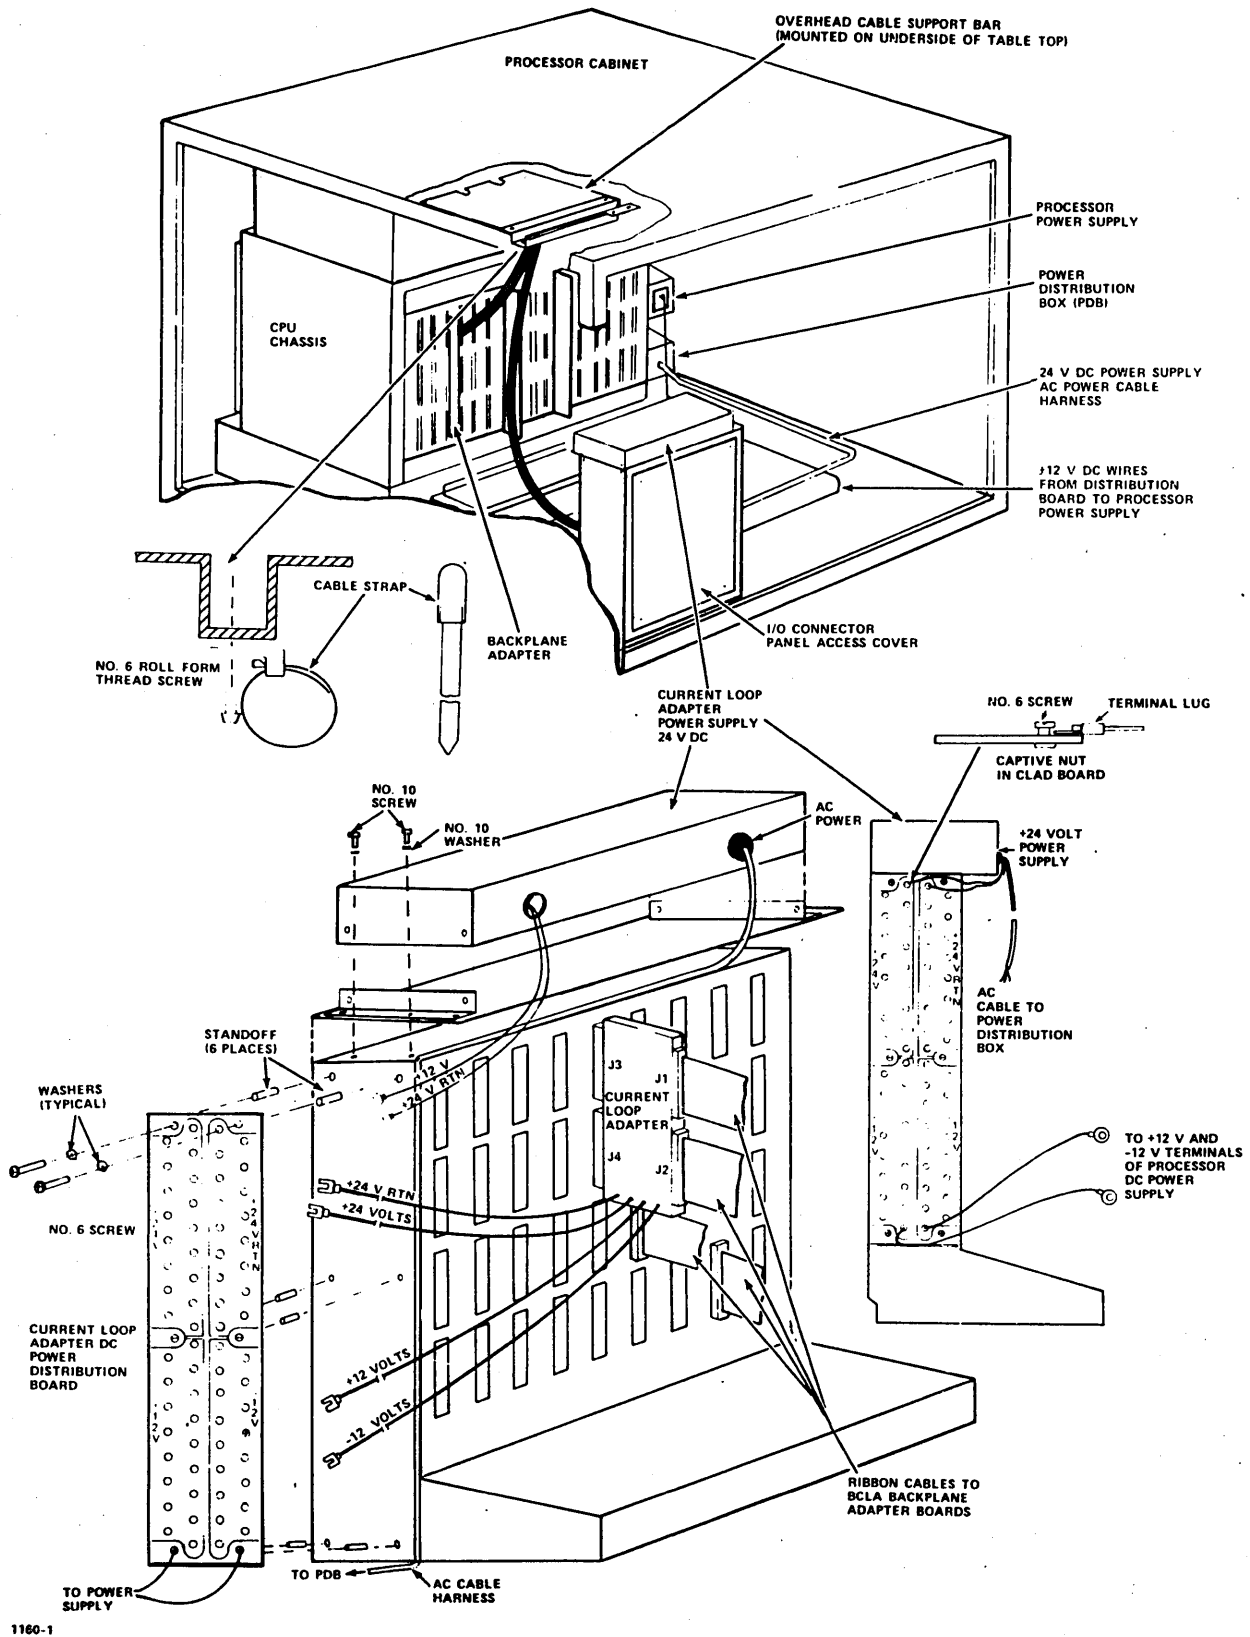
Cabinet Overhead Cabling and Power Supply Installation
